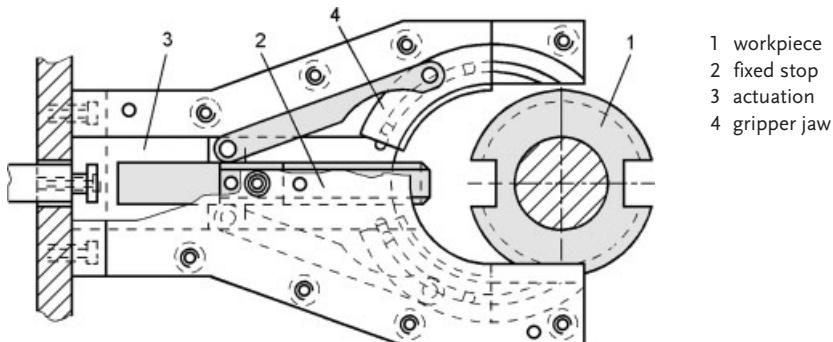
Impactive gripping unit for tool exchange equipment
